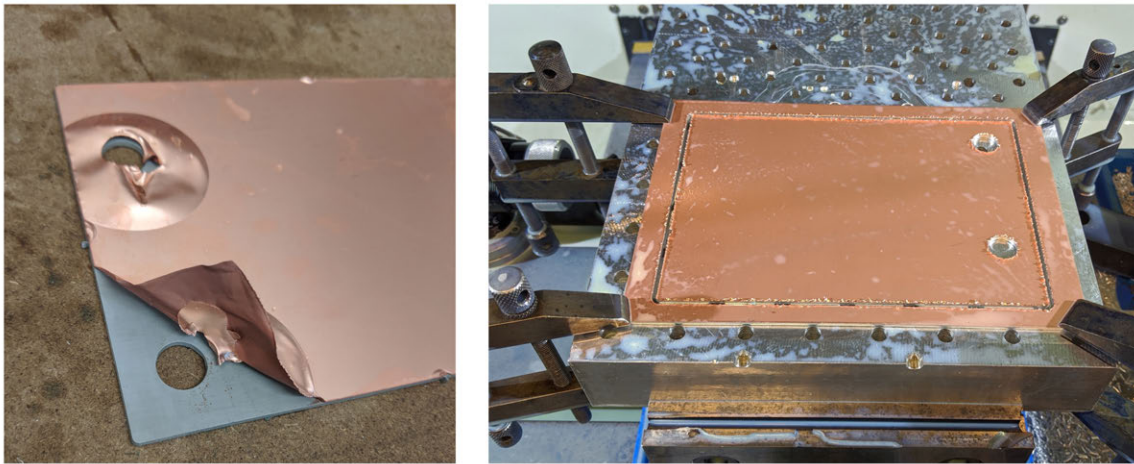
Left: results of waterjet cutting attempts. Right: CNC machining.
